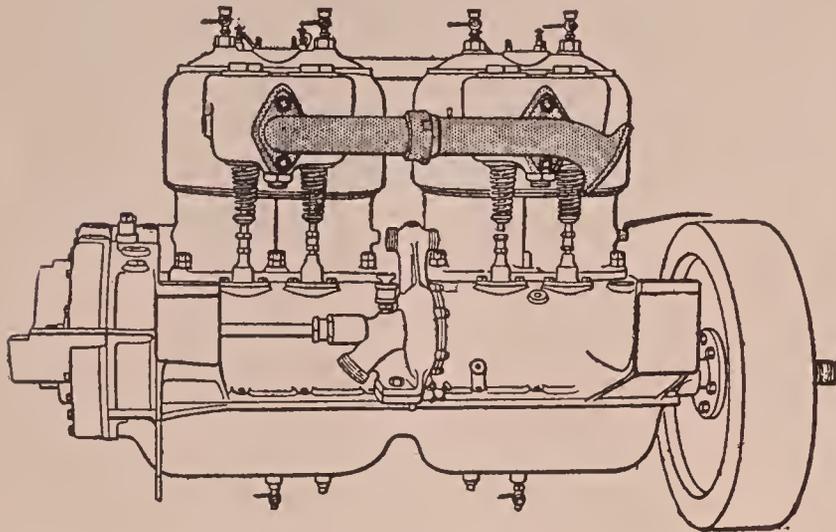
How the exhaust side of the motor looks ing the piston pins at the left with locking screws. gine crankcase with the oil can removed and the
